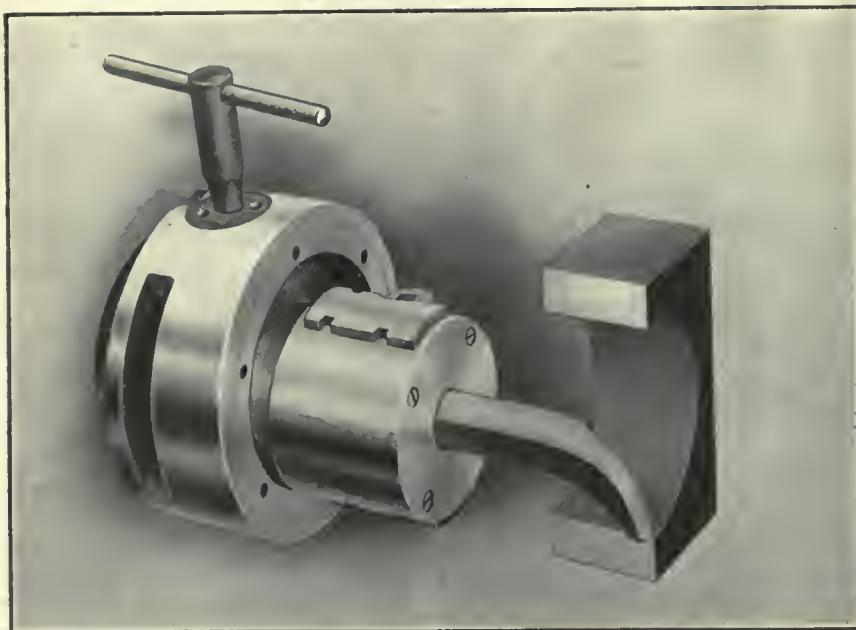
MARVIN & CASLER OFFSET BORING HEAD.
